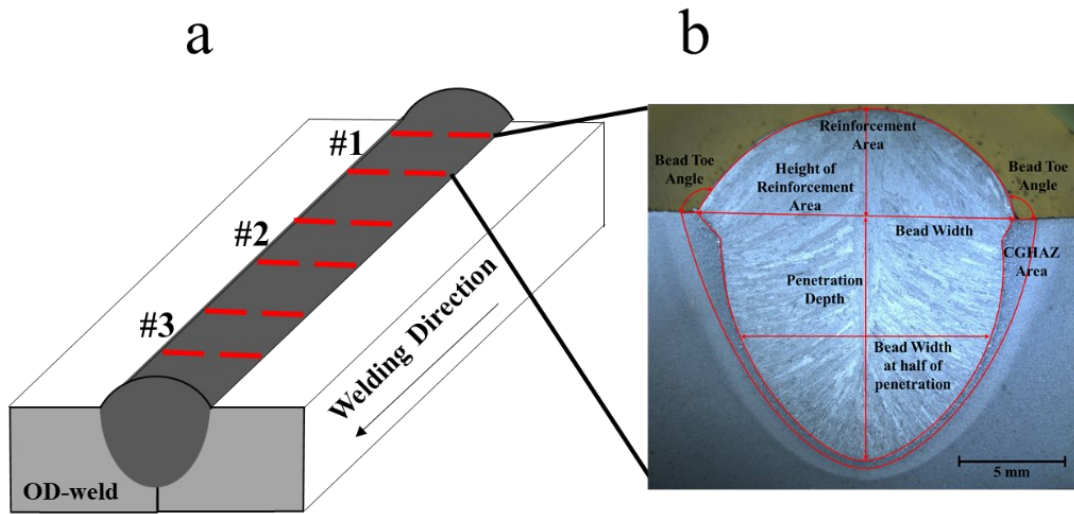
a) Schematic showing sectioning position of welds. b) Macrograph of Sample Test 1-1.
